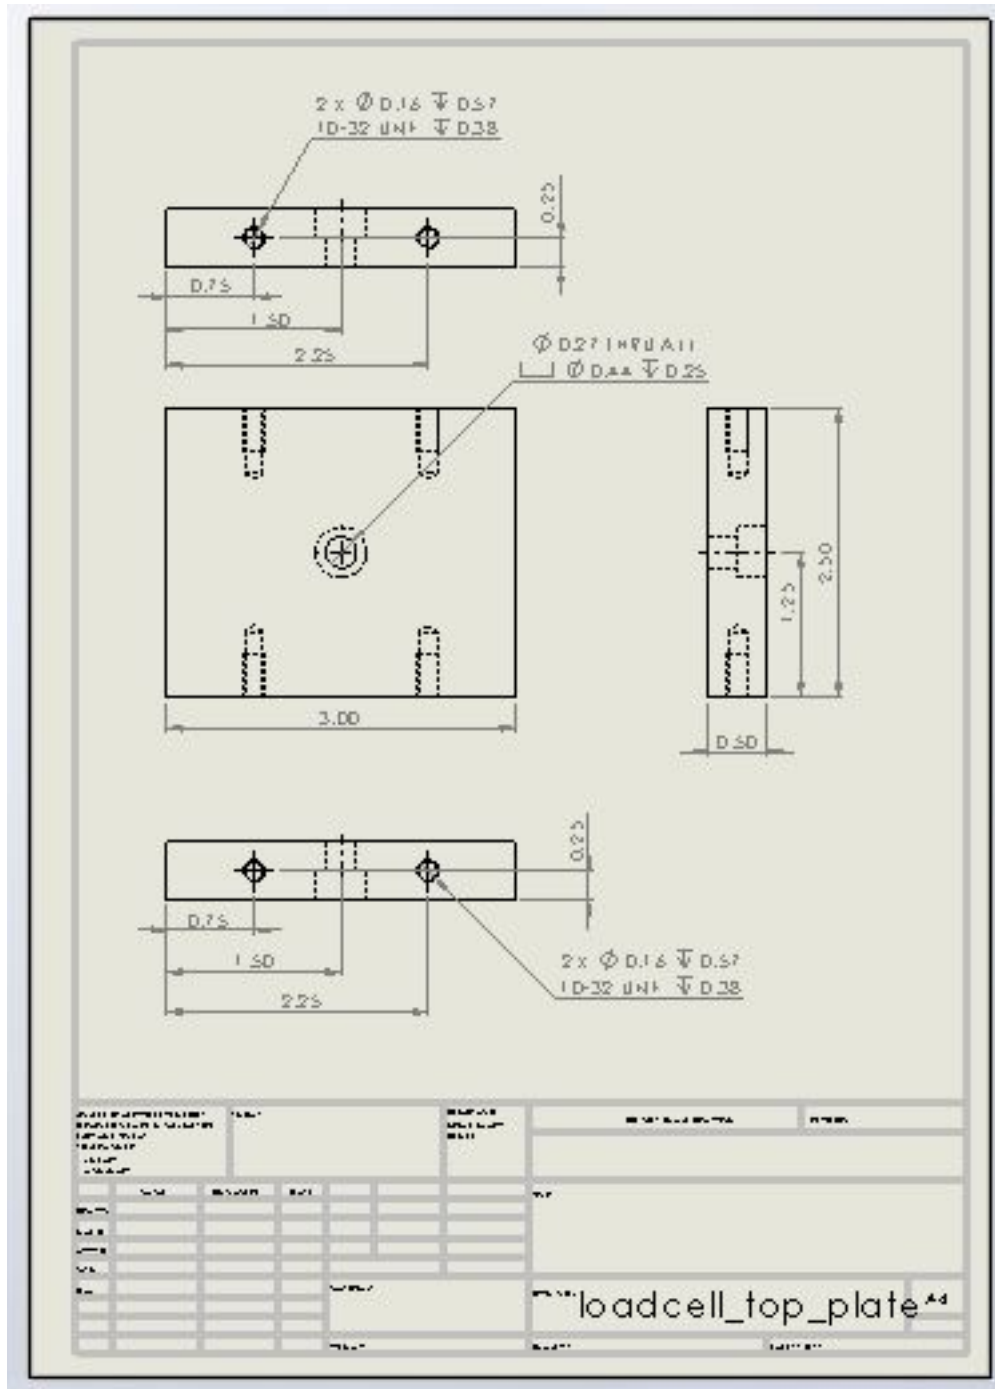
Dimensioned drawing of loadcell top plate for ligament attachment fixture.
